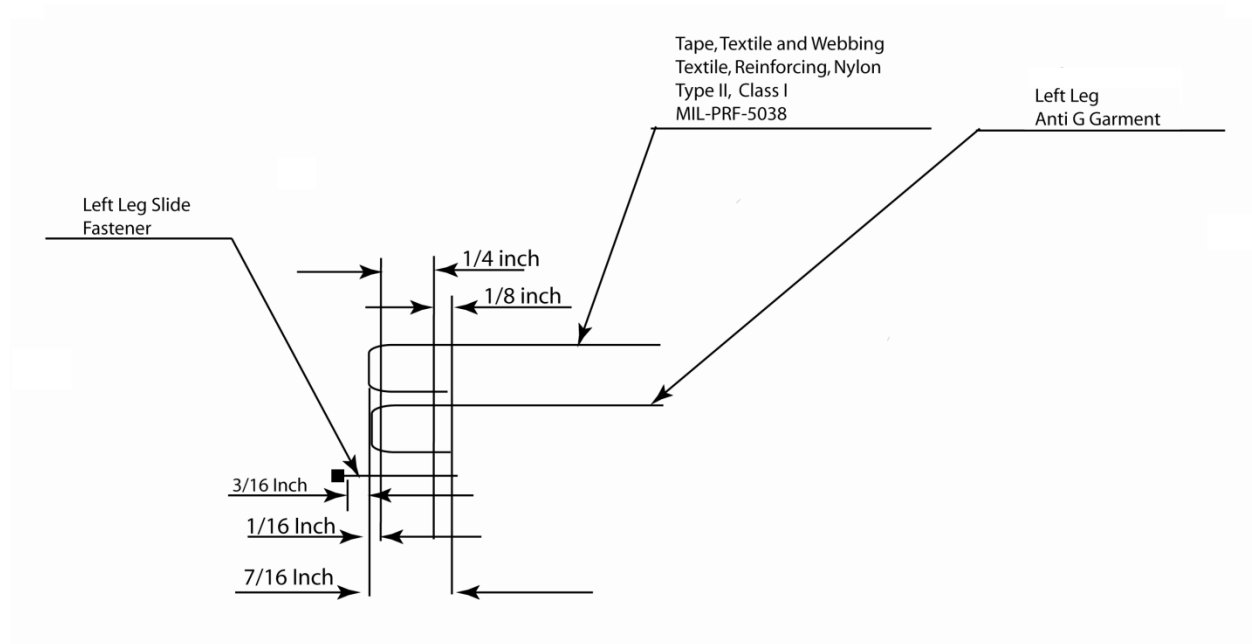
Attachment of kneeboard assembly to the leg slide fastener side.
